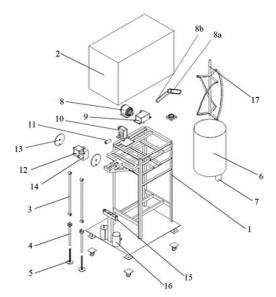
Drawing of Semi-automatic split-gill mushroom spawn mixing and pressing machine
